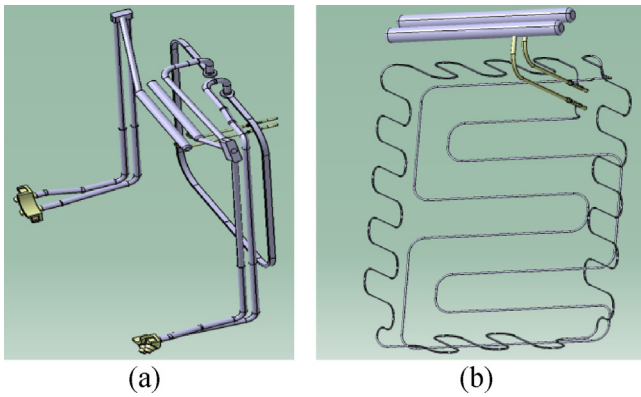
PP flange (a) and flange serpentine (b) cooling sub-circuits.
